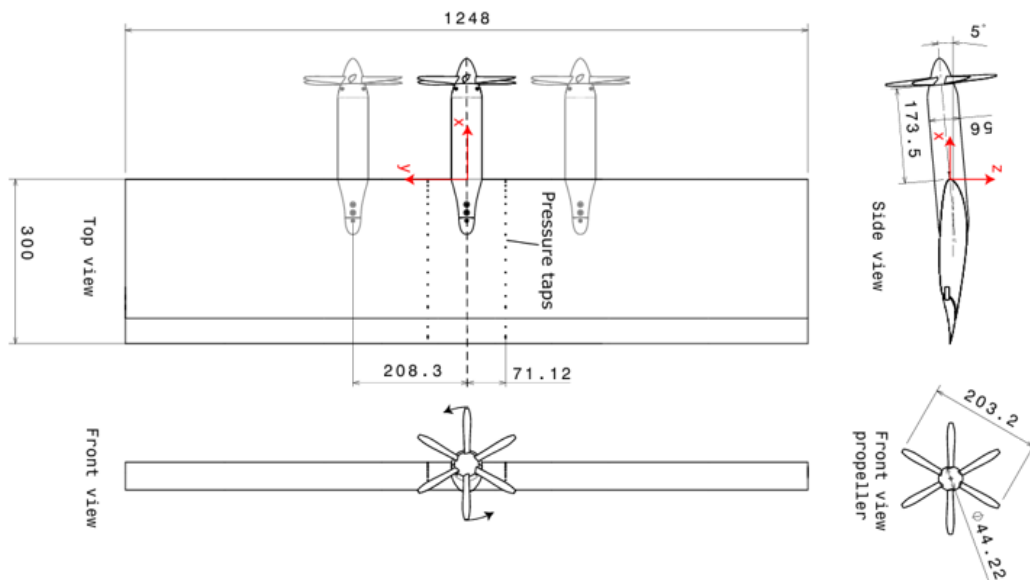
Technical drawing of the TUD-PWF reference model with key dimensions (mm) [73].
